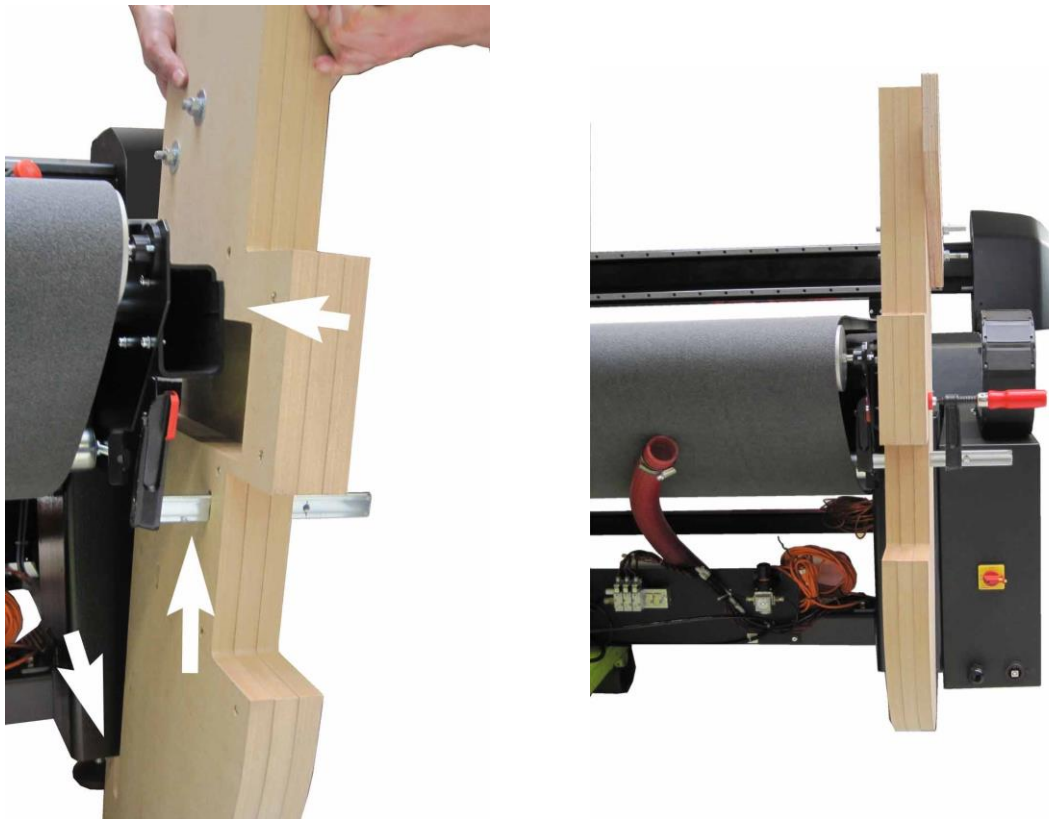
MOUNT FIXTURE RIGHT SIDE
